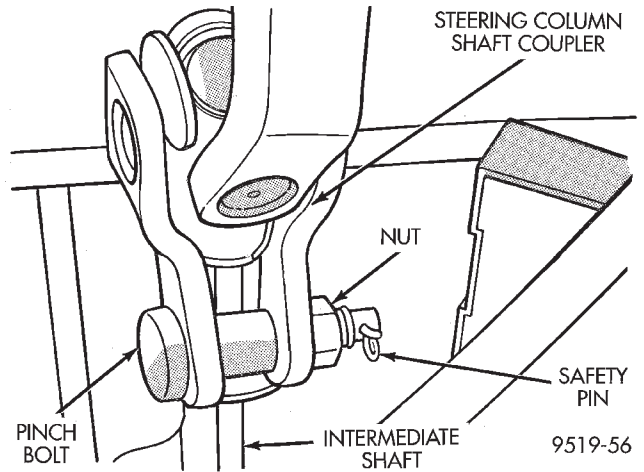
Steering Column Shaft To Intermediate Coupler Attachment
